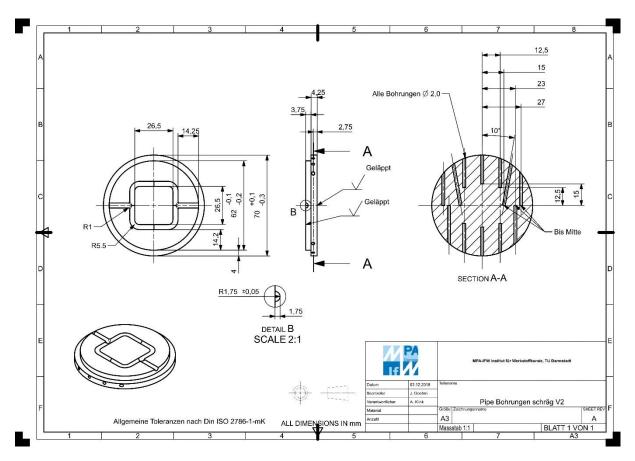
Technical drawing of the specimen "Complex channel geometry".
